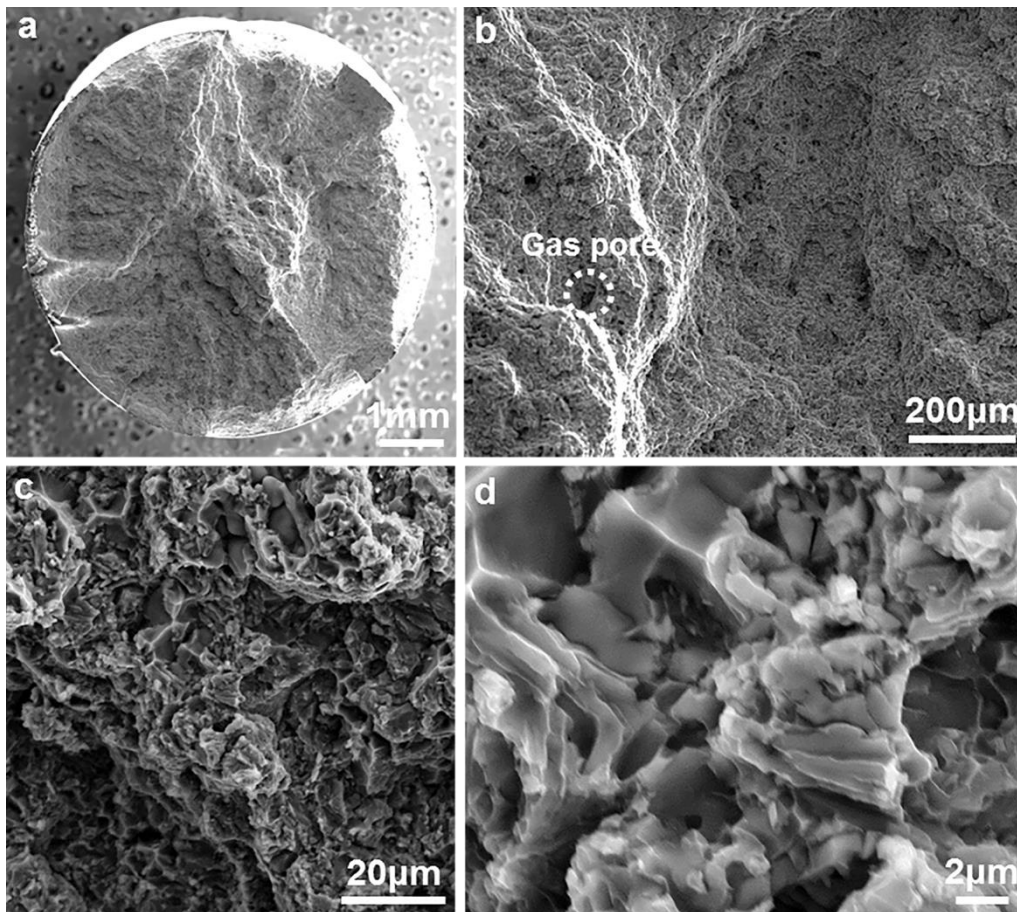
SEM morphology of the fracture surface of the as-cast AlSiCuMgMn alloy processed by high pressure die casting, (a) macroscopic fracture of the tensile bar, (b) gas pores on the fracture surface, (c,d) the enlarged fracture surface.
